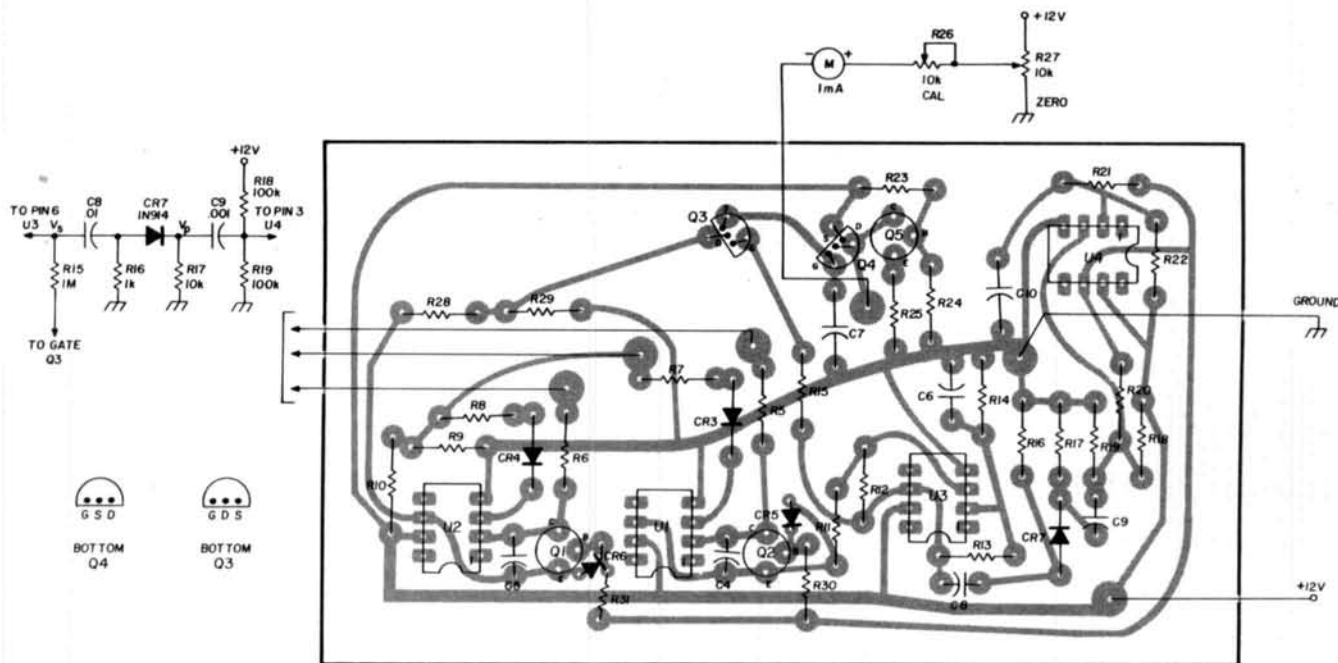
Parts placement and corrected board layout for the simple computing vswr indicator by WB9CYY.
